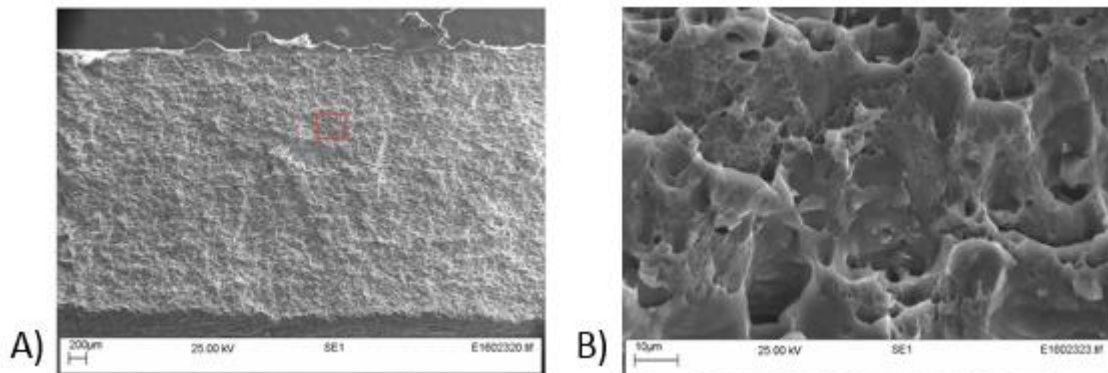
A) Fracture surface of sample W14 and B) magnification (Courtesy of TWI,Ltd).
